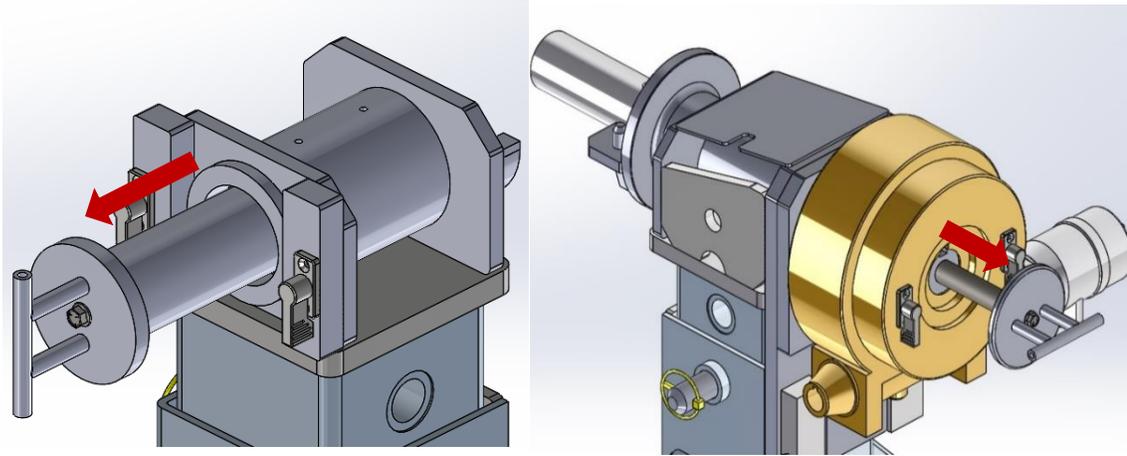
Operating Procedure for Welding Fixture Changeover, Retract shafts, Both Ends
